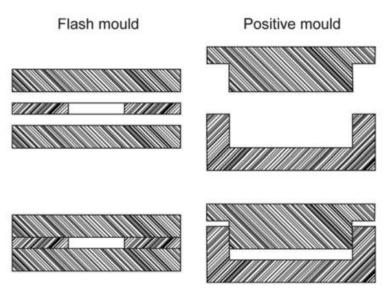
Side view of flash mold and positive mold (Institution, 2005)
